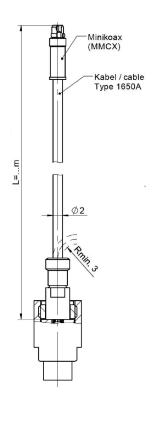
Pressure sensor Type 6152B with coaxial cable
